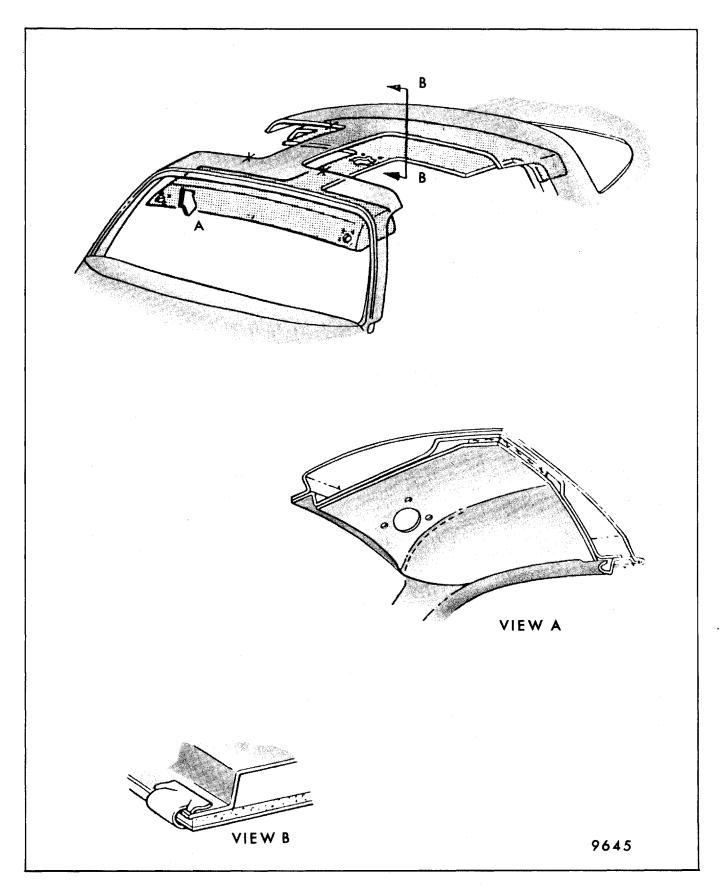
Hatch Roof Headlining - F Style Shown, A Styles Similar
